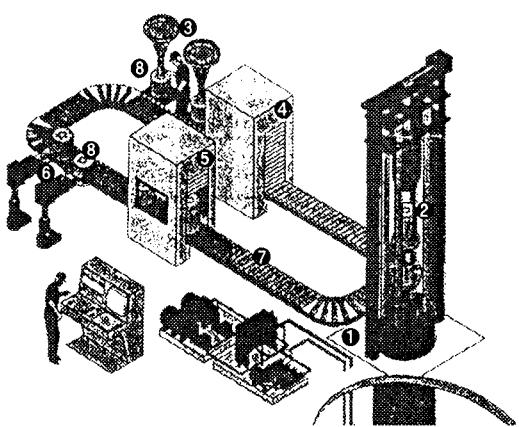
A wet bag isostatic plant. 1) Automated wet bag isostatic press, 2) equipment for loading mould into pressure vessel, 3) powder dosing and mould filling equipment, 4) wash booth, 5) drying booth, 6) compact removal unit, 7) tooling conveyor, 8) tooling. (Courtesy of Engineered Pressure Systems, Inc.)
